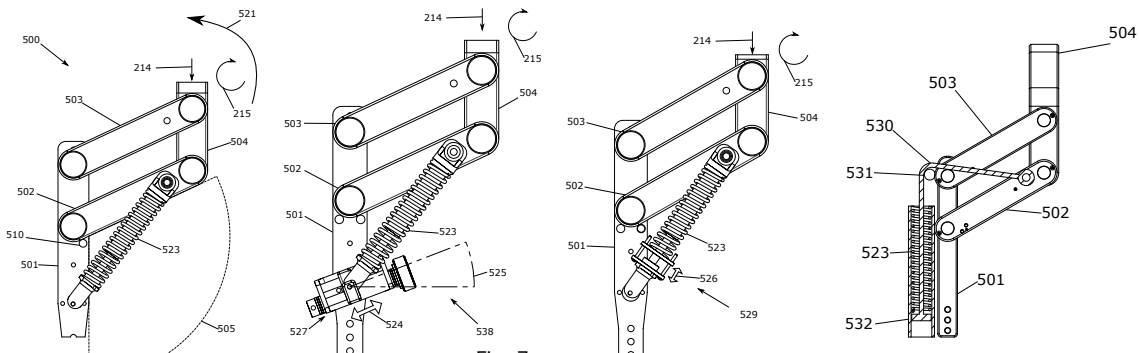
Scapular Torque Generator (a) position adjustment (b) preload adjustment (c) cable and pulley (d).
